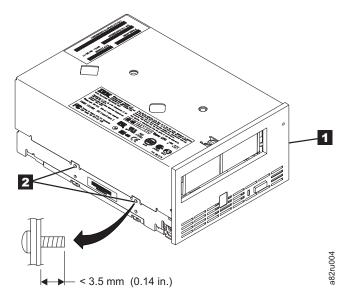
Mounting holes on drive. The holes are located on both sides of the drive. The drive is shown with a front bezel.
